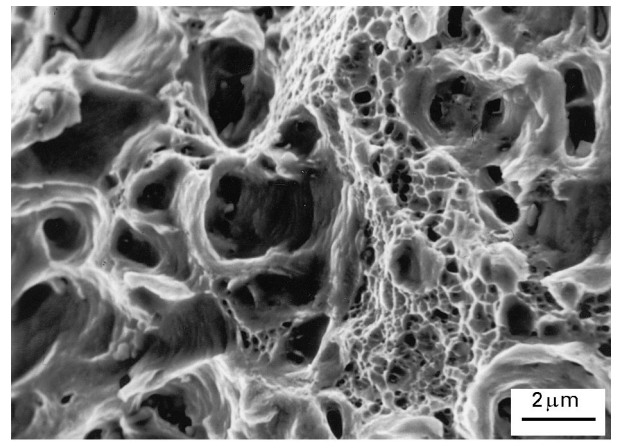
Fracture surface of tensile specimen of 6061 alloy in the T6 temper.
